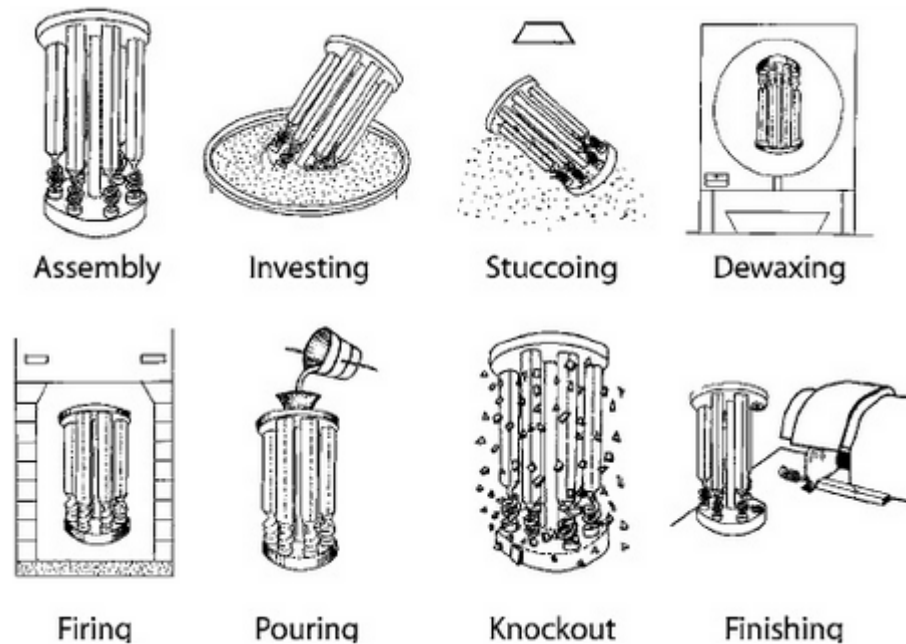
The Production of Turbine Blade Alloys by Investment Casting [11]
